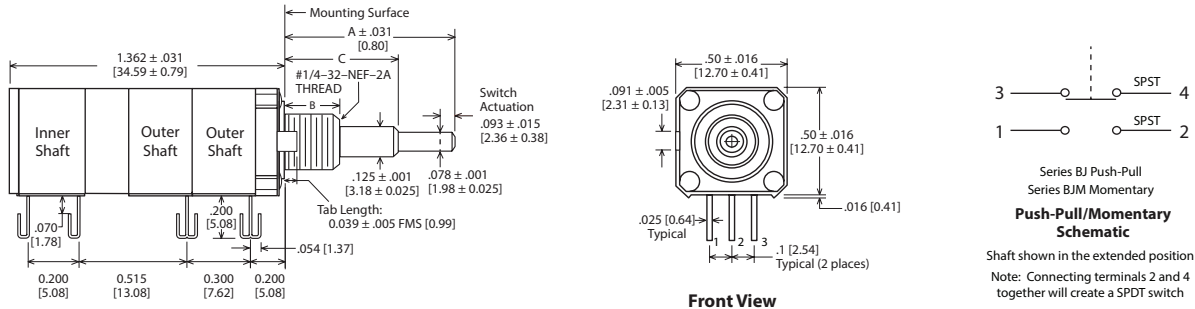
SHA12: Concentric Shafts, B22, 2 Potentiometer(s) or RS + MP, 1/4" Bushing
